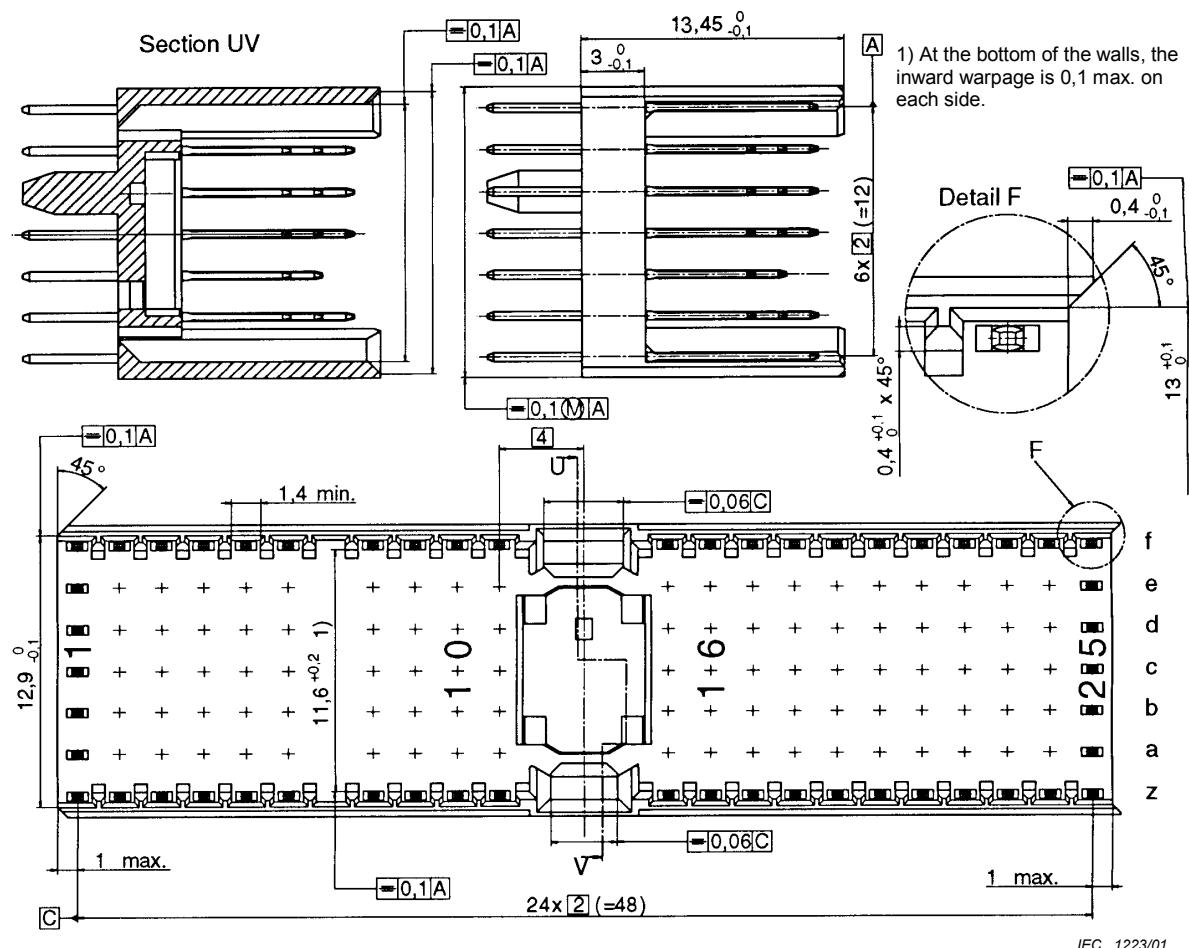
Dimensions of style A, fixed 50 mm module with MPC (five rows)
